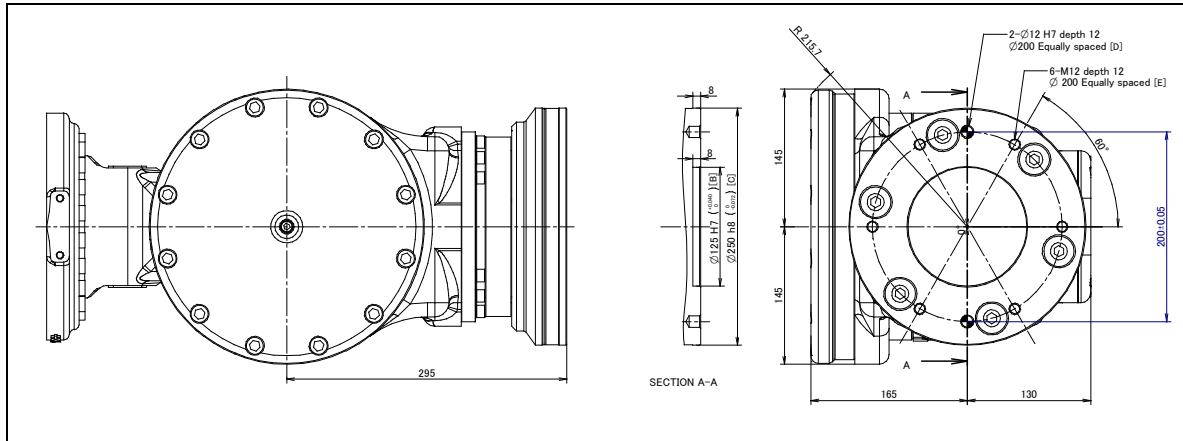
(b) End effector mounting face (Insulated flange)
